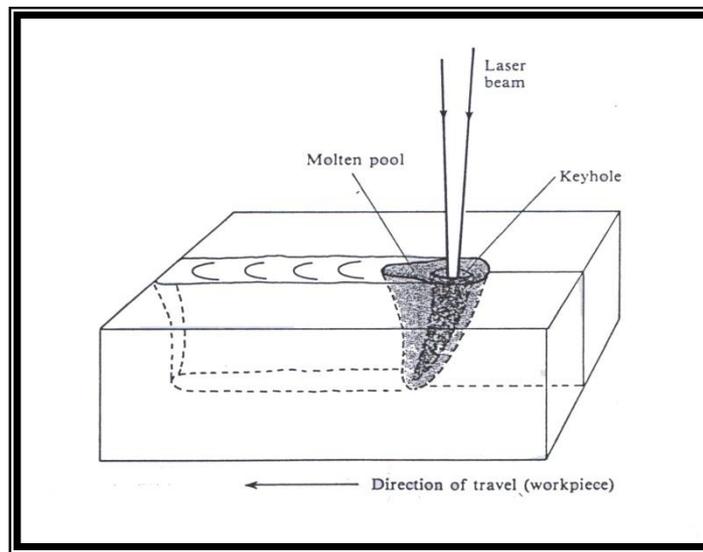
formation of a “keyhole” during high power laser welding[4]
